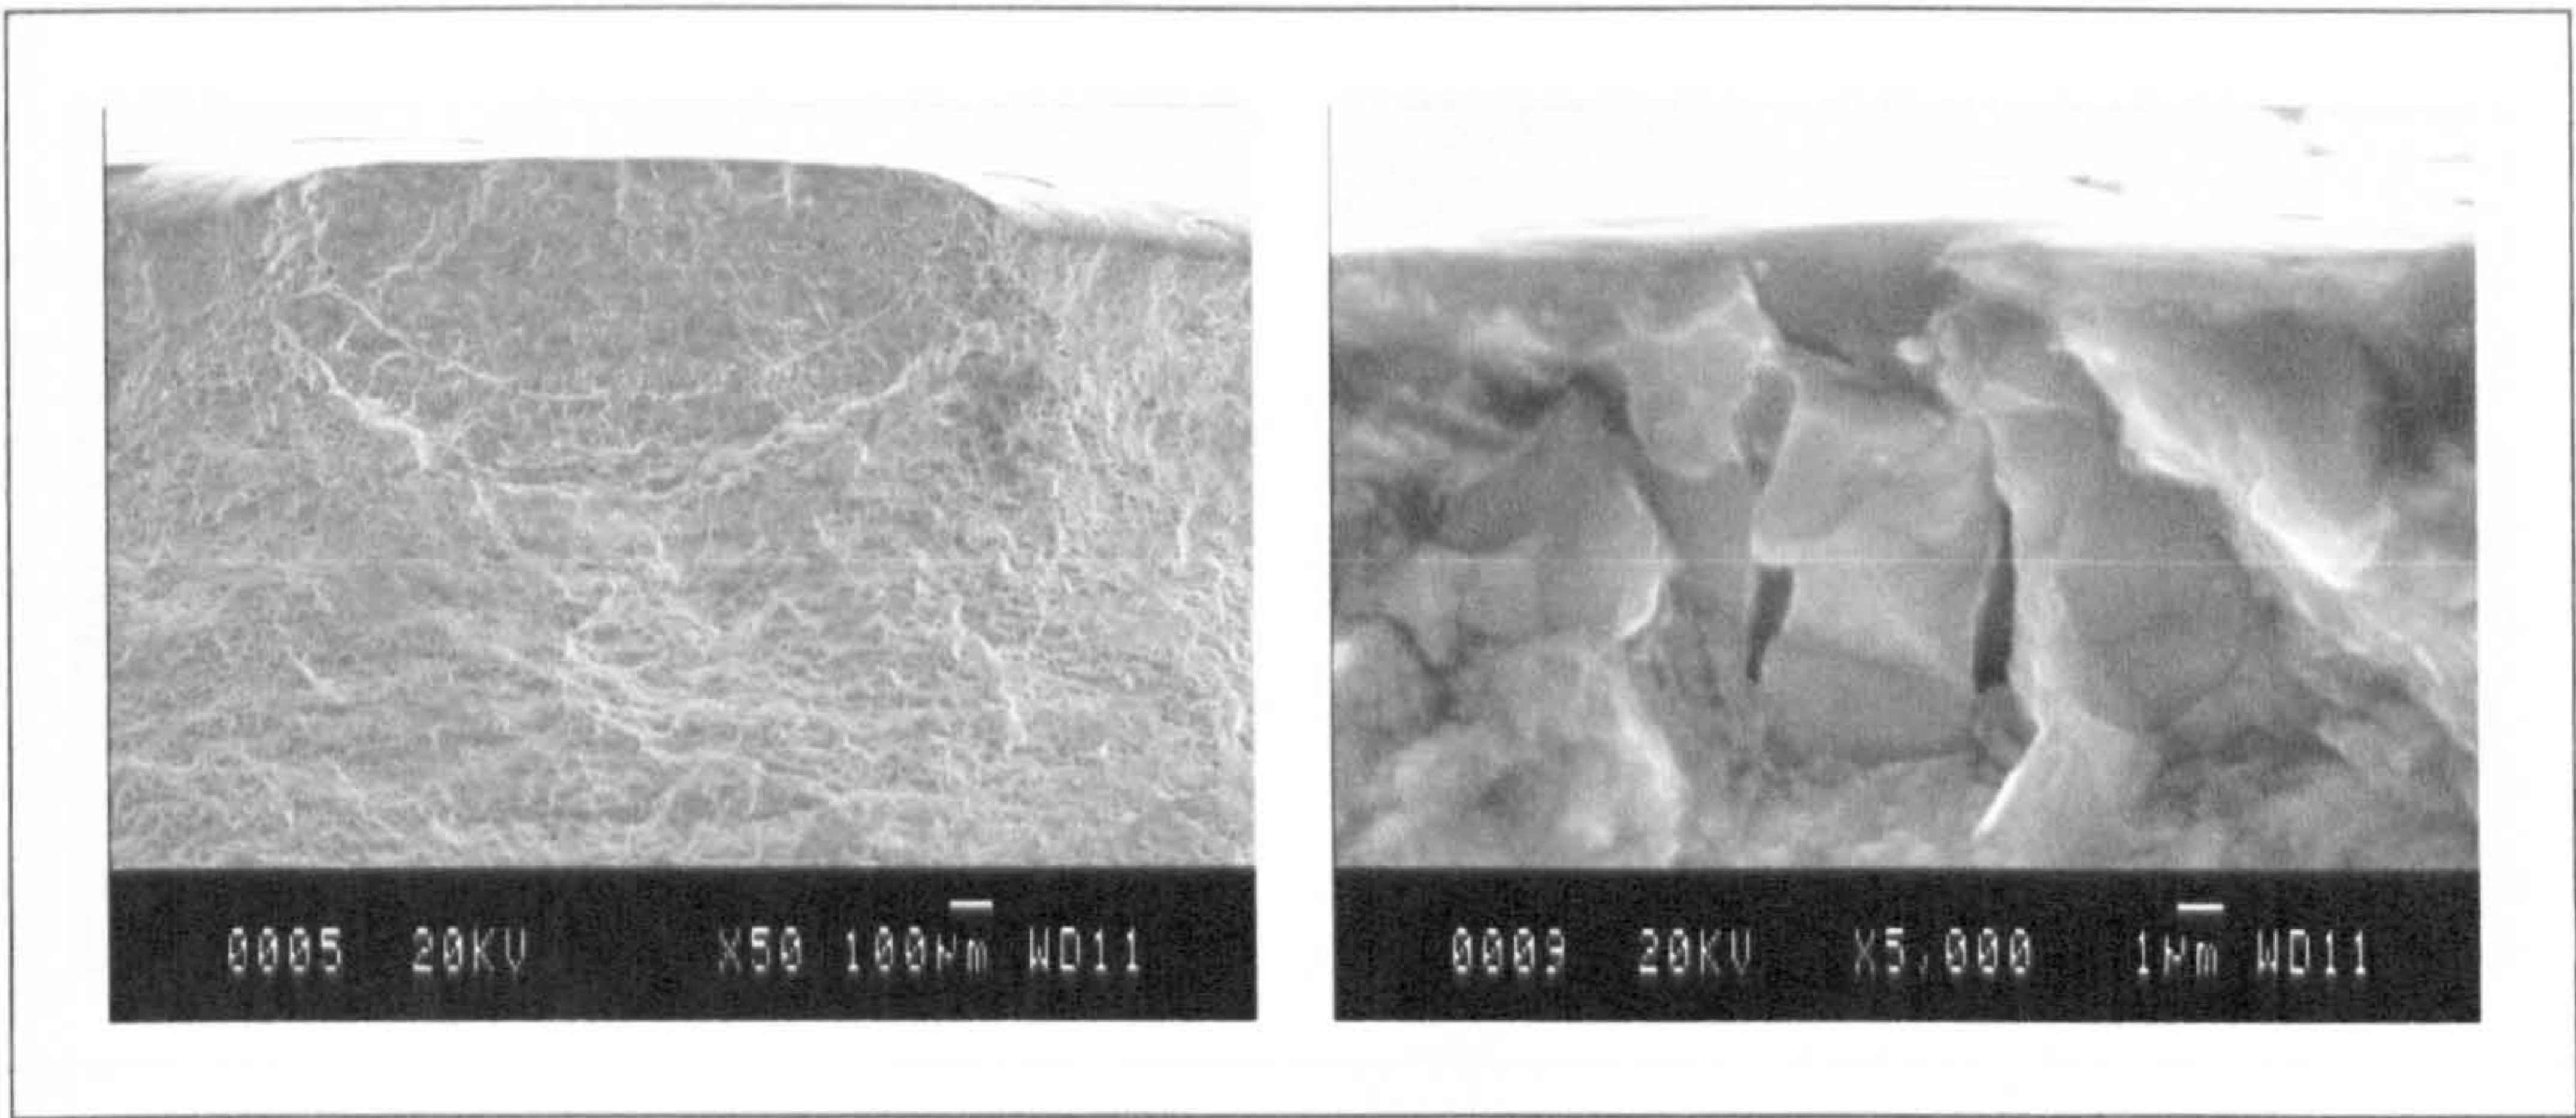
FS DPR SCG 1 fatigue crack surface and intermetallic induced initiation site.
